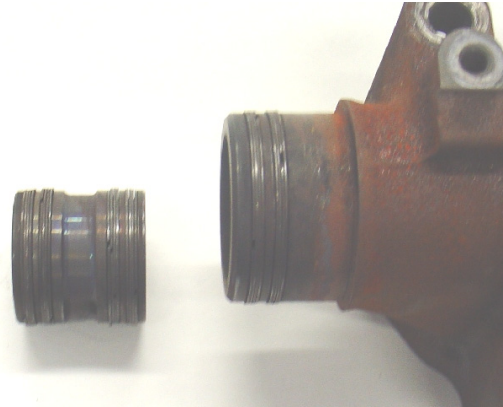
Exhaust Manifold Junction and EGR Connector Sealing Rings
